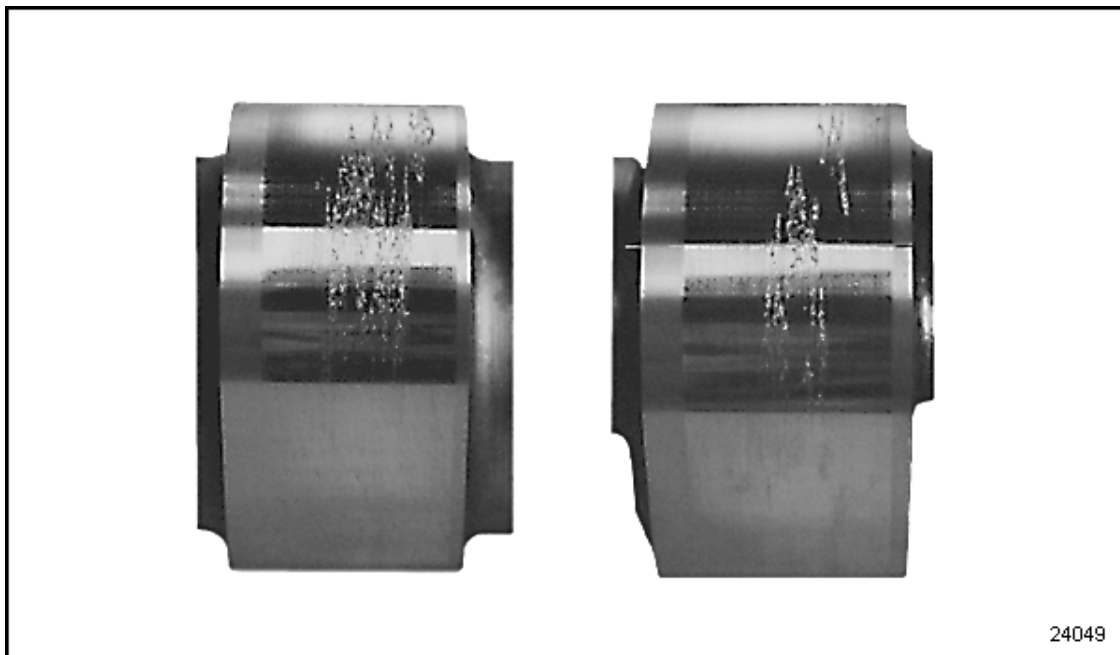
Camshafts Exhibiting Wear and Pitting
